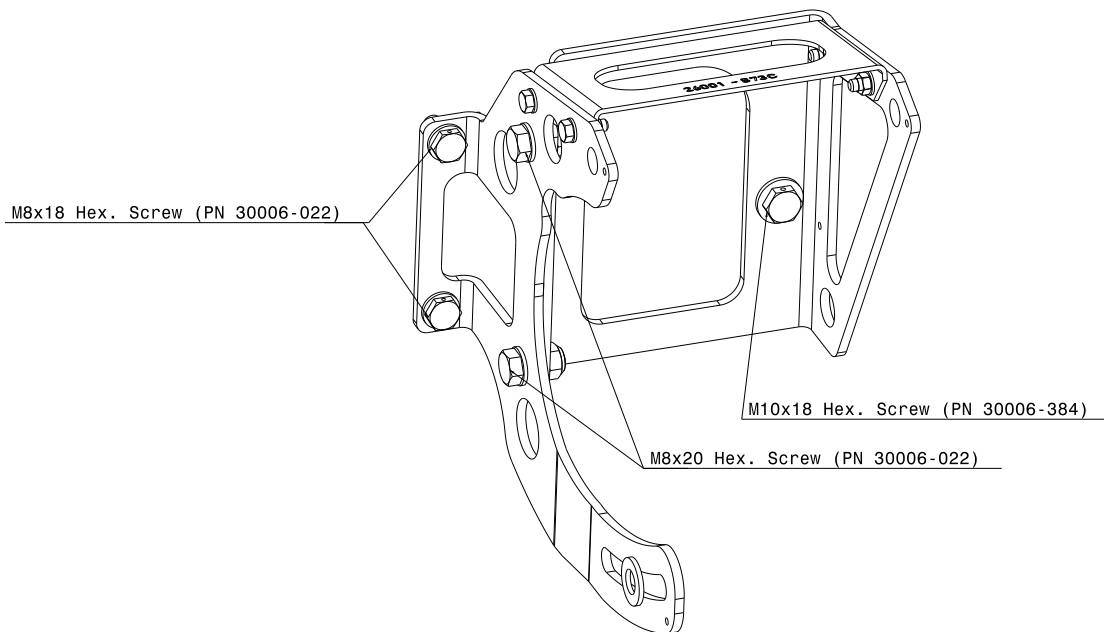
Isometric view Side Frames left hand side 300A 915iS
